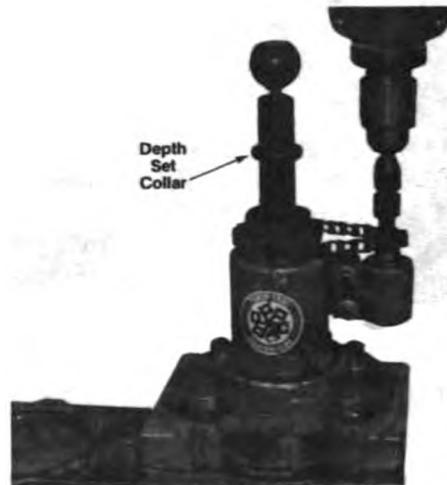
(V50155). Install The Drill Onto The Boring Tool.
